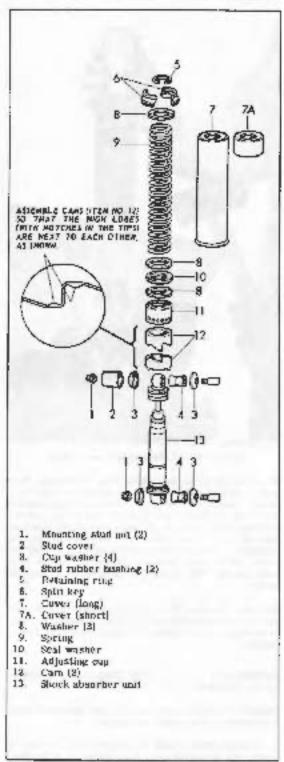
Y-18A. 1967 & Later Rear Shock Absorber -Exploded View
